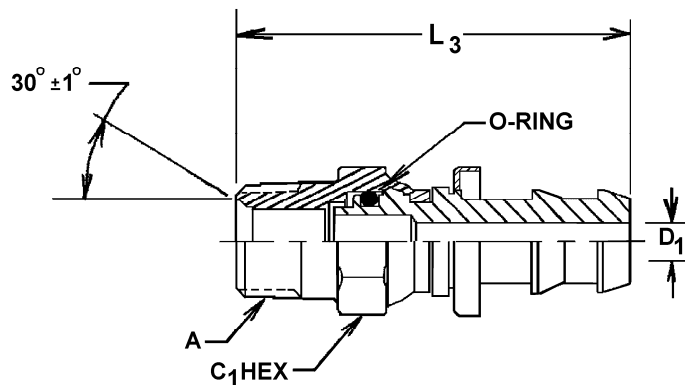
SWIVEL MALE PIPE THREAD PUSH-ON HOSE FITTING
